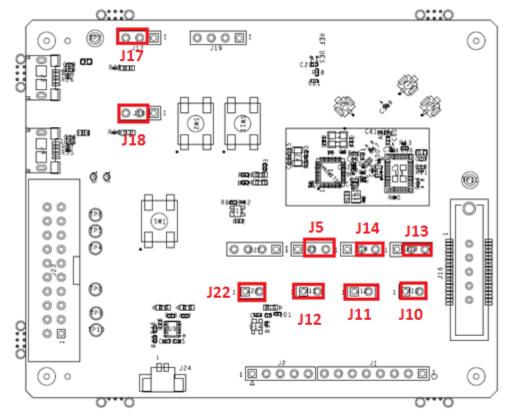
Board Layout Highlighting Jumper Settings with RED Color
